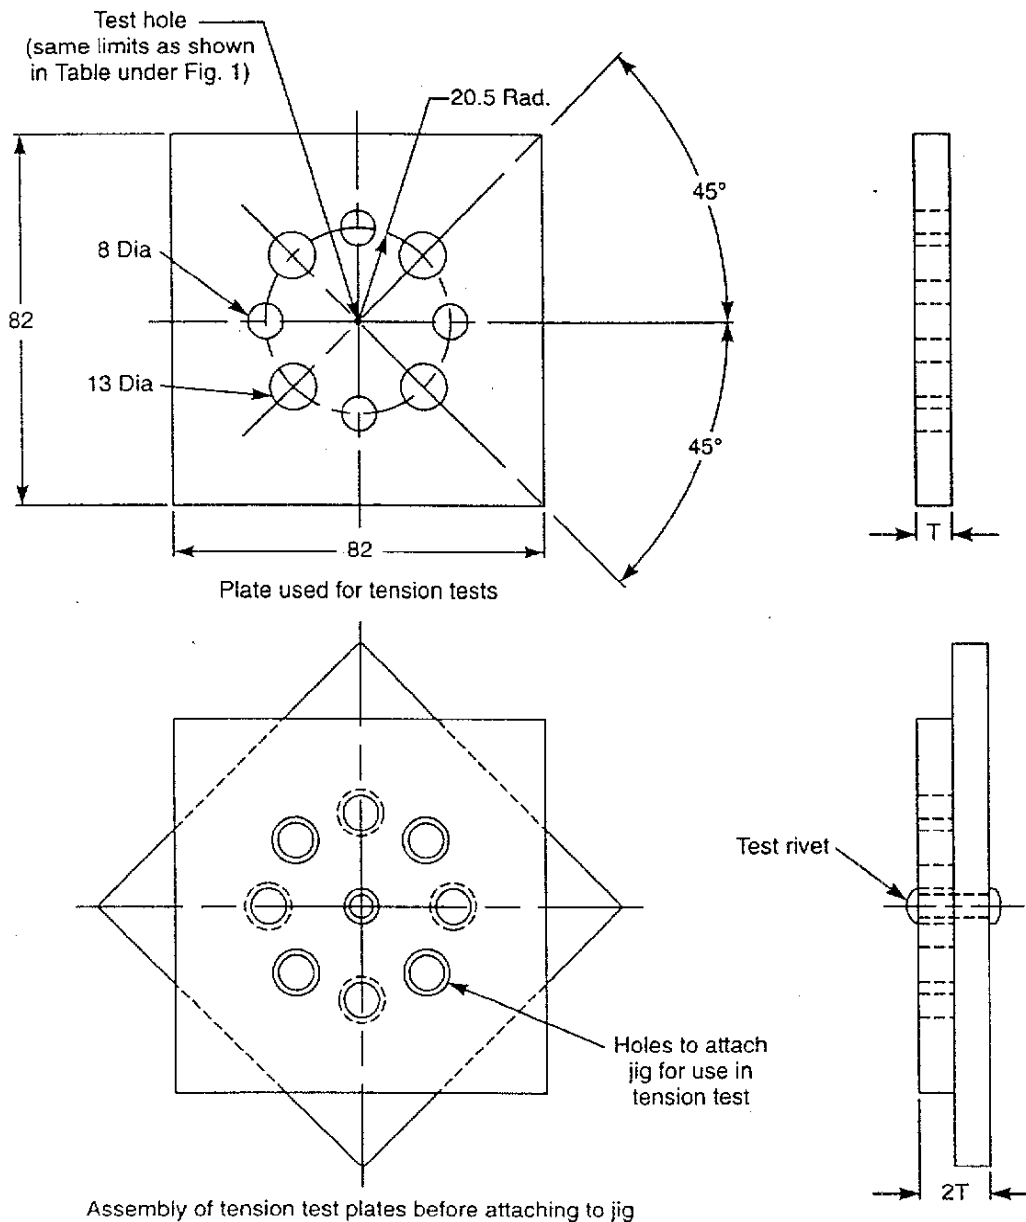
Test Fixture for Tensile Testing Metric Blind Rivets
